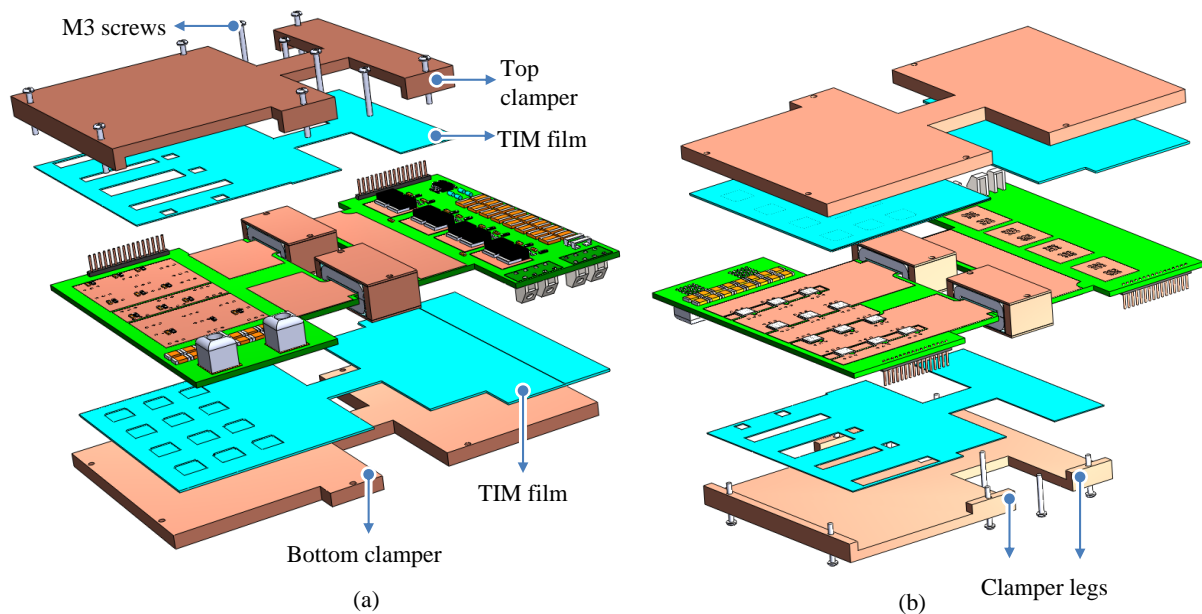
Exploded view of 2 kW DAB converter with DSCC (a) top side and (b) bottom side
